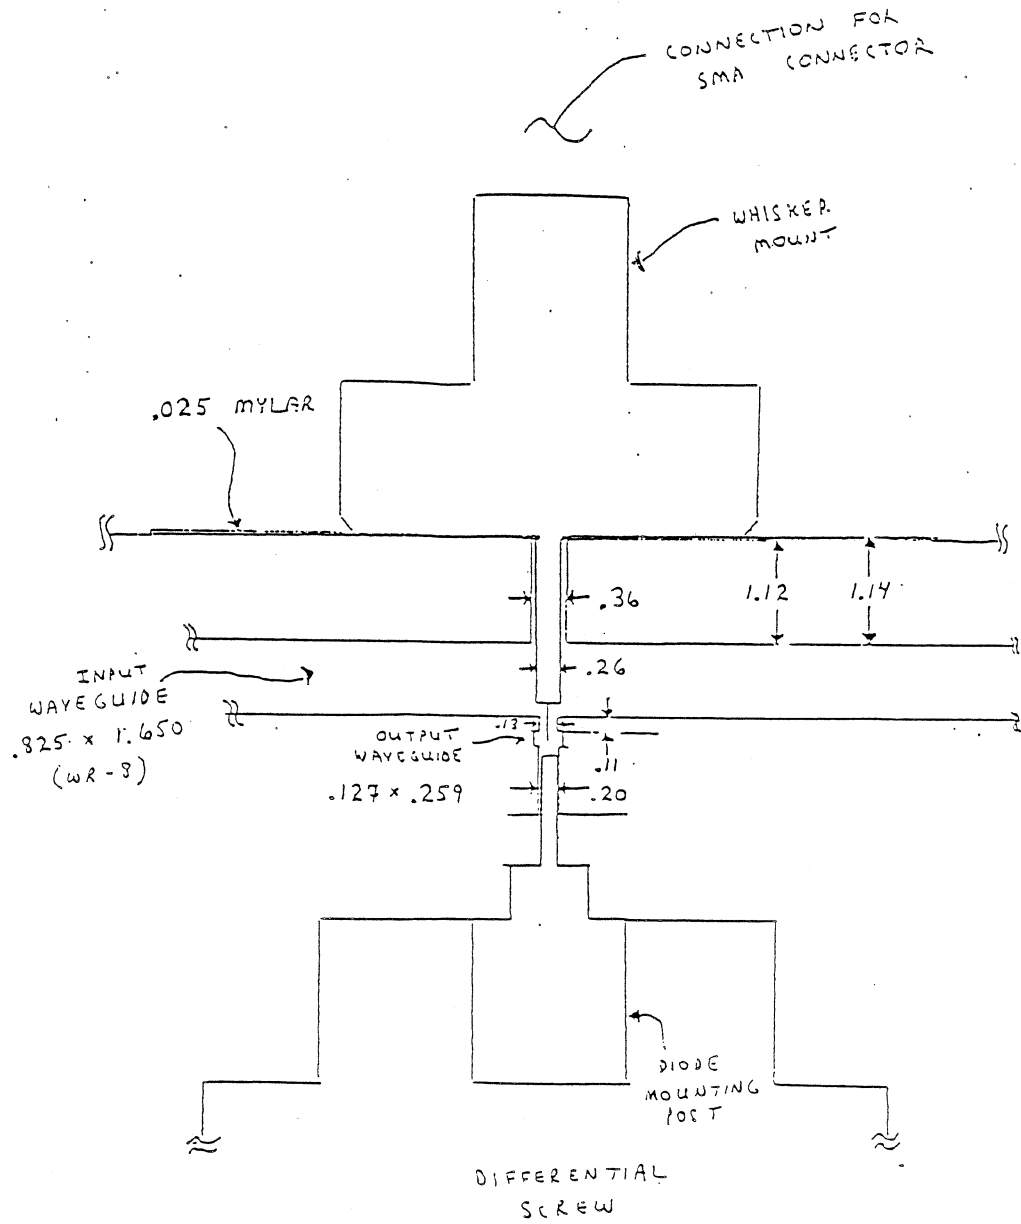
Layout and dimensions of the quintupler for 600-720 GHz. The dimensions are in millimeters.
